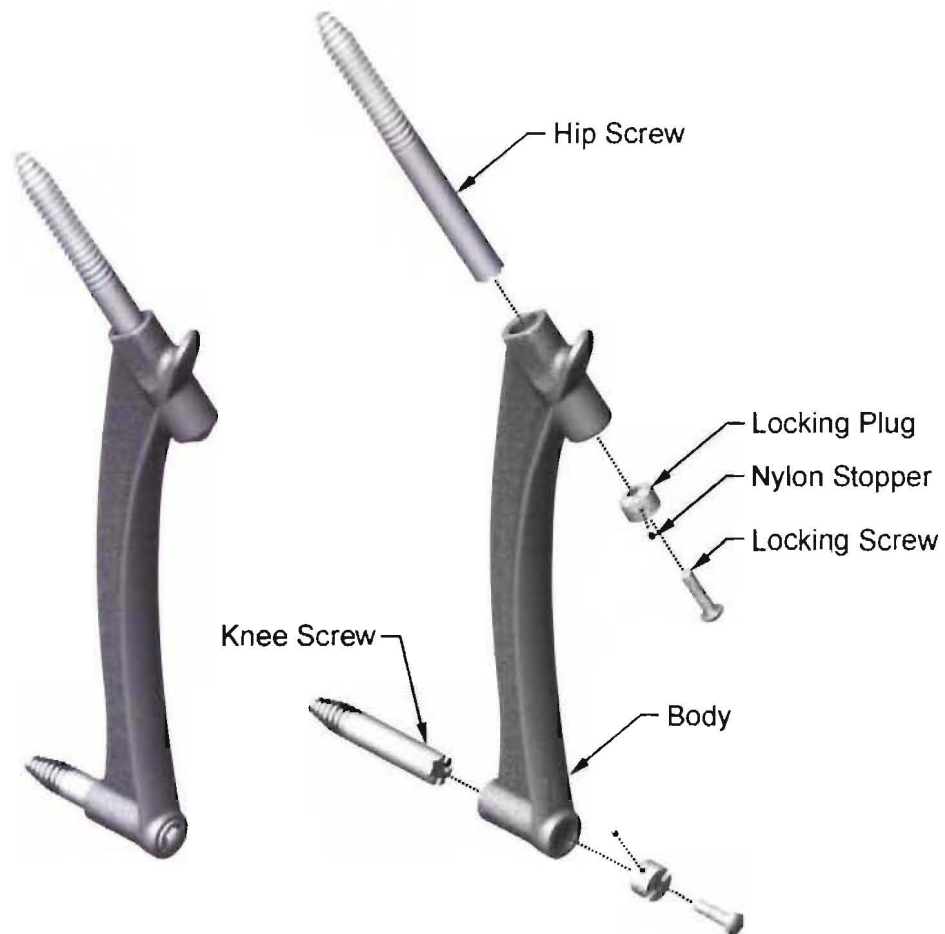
Assembled & exploded views of the femoral endoprosthesis.
